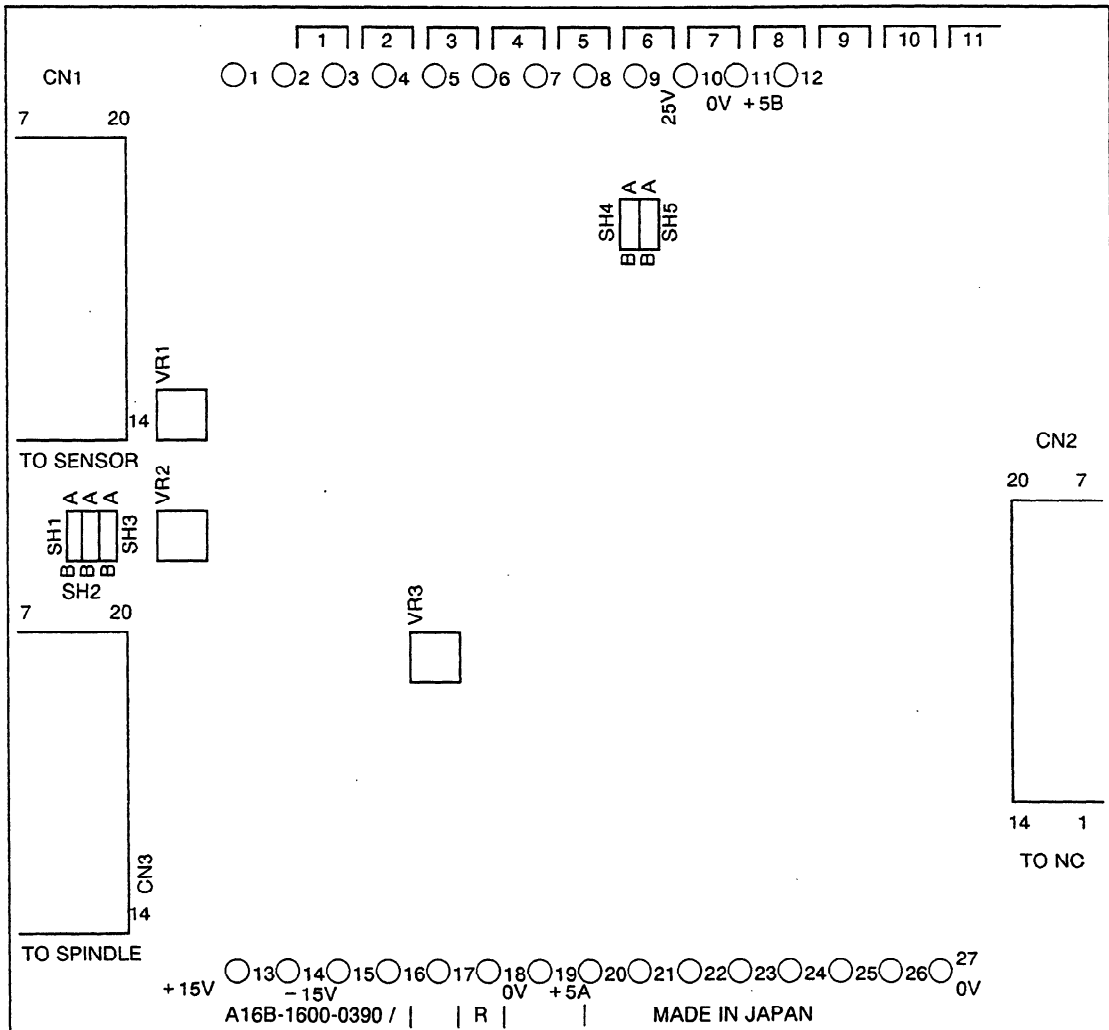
(c) Mounting Positions of Jumpers, Variable Resistors, and Test Points (PCB drawing No.: A16B-1600-0390)
